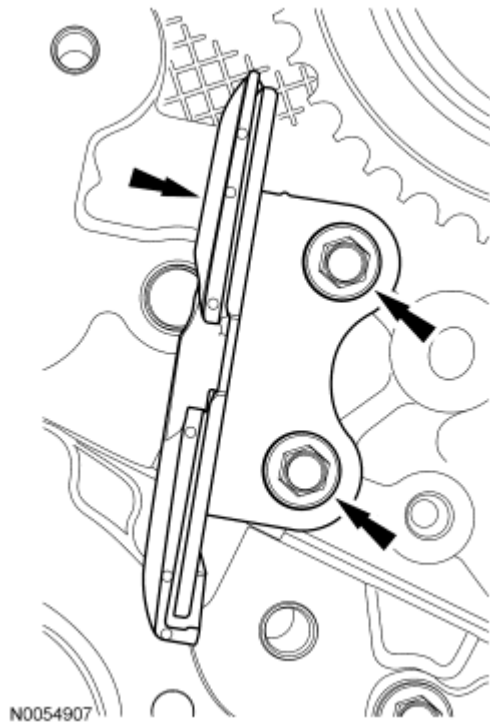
Locating Upper LH Primary Timing Chain Guide Bolts
